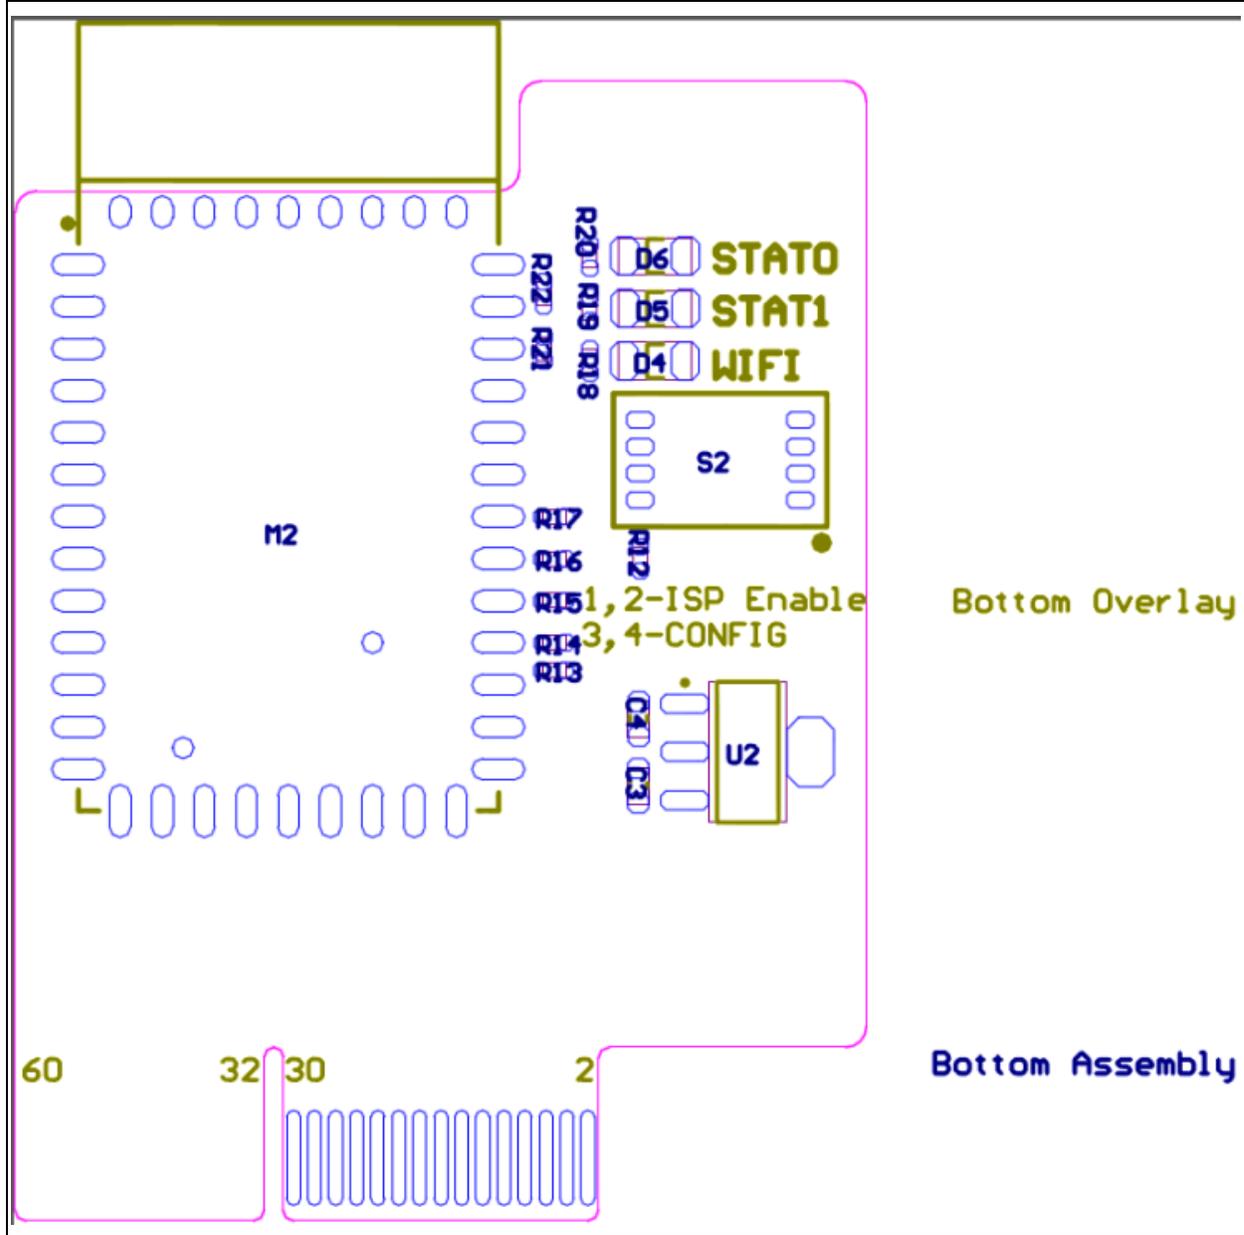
RN131 PICtail™/PICtail PLUS DAUGHTER BOARD BOTTOM ASSEMBLY DRAWING
